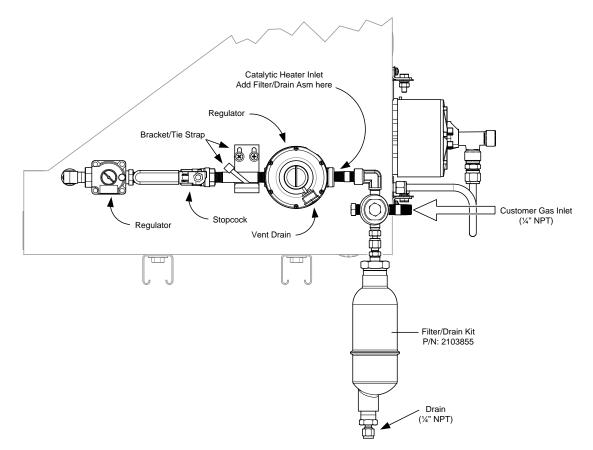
ENC82S Filter/Drain Assembly Installation
